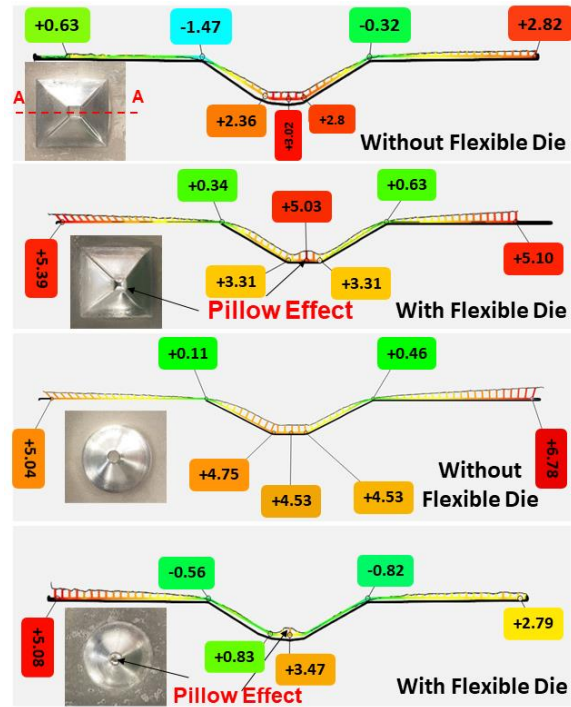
Measurements of formed parts with and without flexible die (dimensions are in mm)
